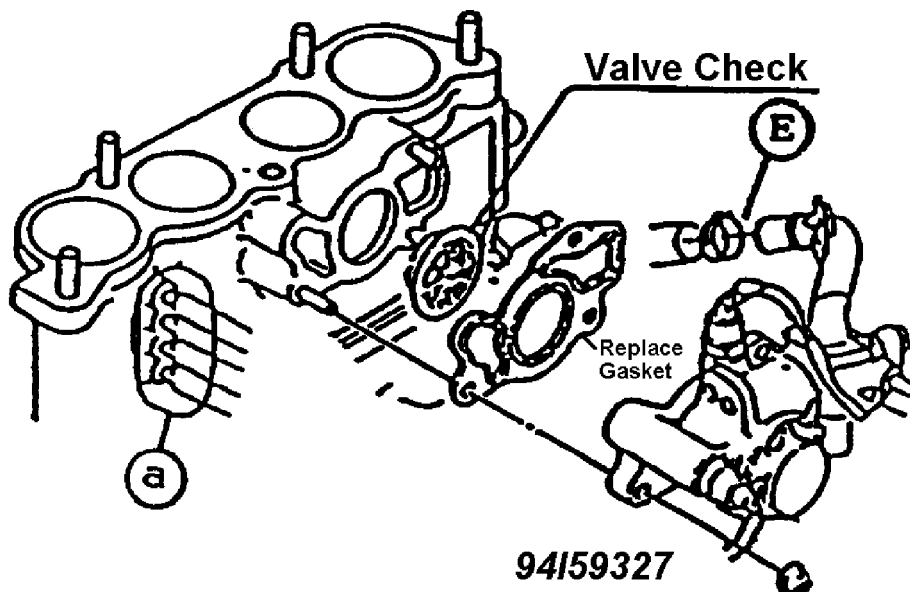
Removal of Relief Air Hose & Vacuum Tubes
